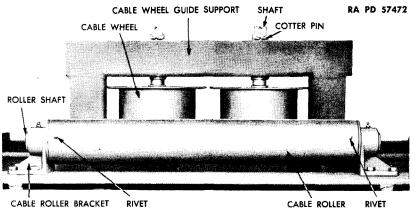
Wheel Cable Guide and Cable Roller Assembly
